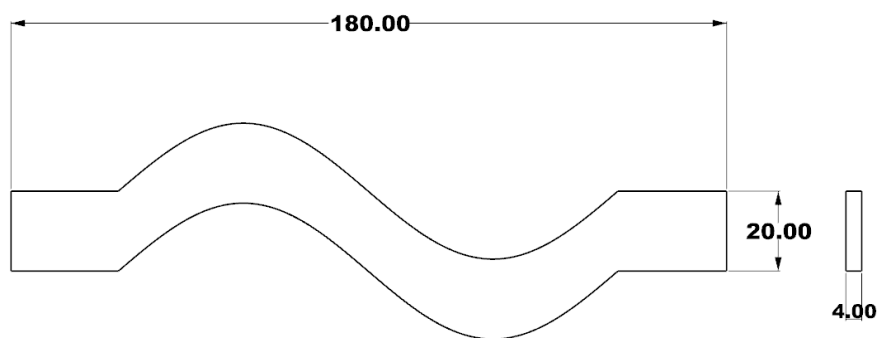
The details of the s-shaped specimen (All dimensions are in mm)
